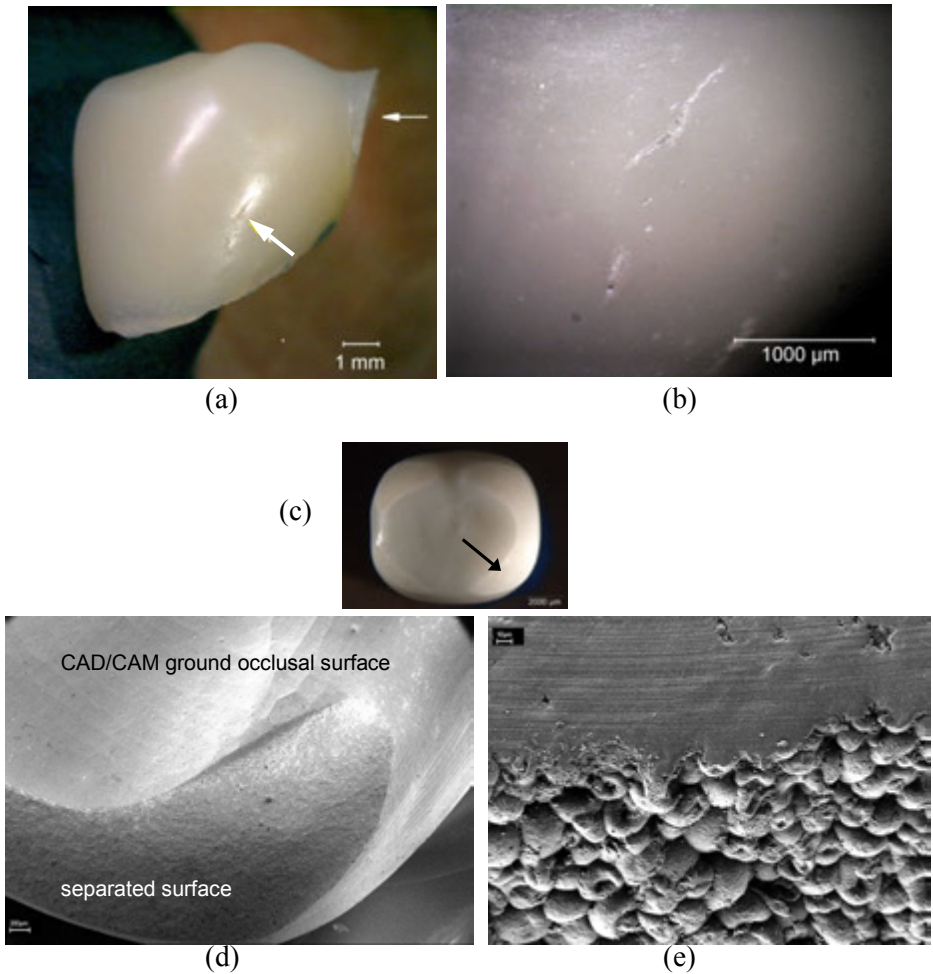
Processing cracks in dental ceramics. (a) and (b) show one tooth of a three-unit alumina dental bridge. (a) shows a frontal (buccal) view of the end unit which fractured at the narrow connection to the next unit (small white arrow). A sintering crack is evident on the face of the crown (large white arrow). It did not cause fracture in this instance because it was in a low stress area. (b) shows a close-up of the processing cracks. (c) – (e) show a broken zirconia crown. A large piece has separated off a cusp on the crown top (occlusal) surface (c) and (d). The apparent “fracture surface” is in fact a huge processing crack. Portions of the crown separated during firing and what is seen are exposed spray-dry agglomerates. The manufacturer claimed the fracture was due to patient overload or faulty installation by the dentist. This was wrong, since the CAD/CAM blank had the processing crack in it. (c - e are courtesy Dr. S. Scherrer and the ETH, the University of Zurich.)
